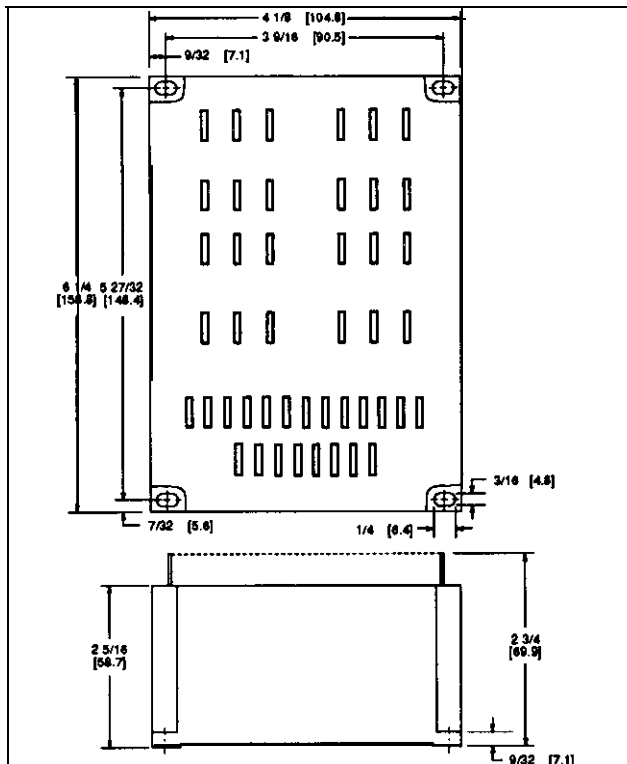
Mounting Dimensions for W7080A, W7081A, W7082A, W7083A, W7084A Units in Inch [mm in brackets]
